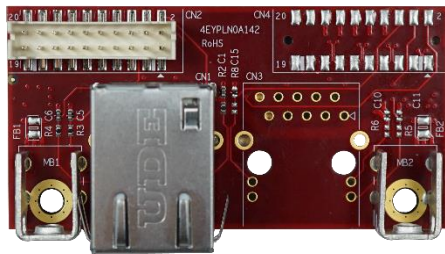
Mounting Hole Daughter Board Picture (EMPL-G101-C1/W1)
